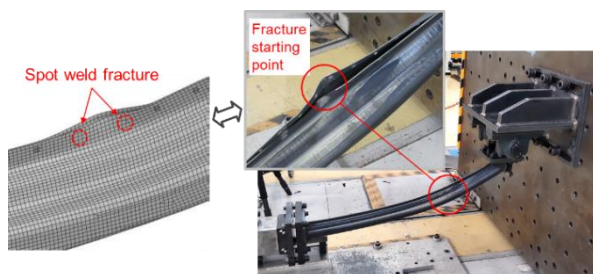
Result of crash test and spot weld fracture prediction in standard assembly condition
